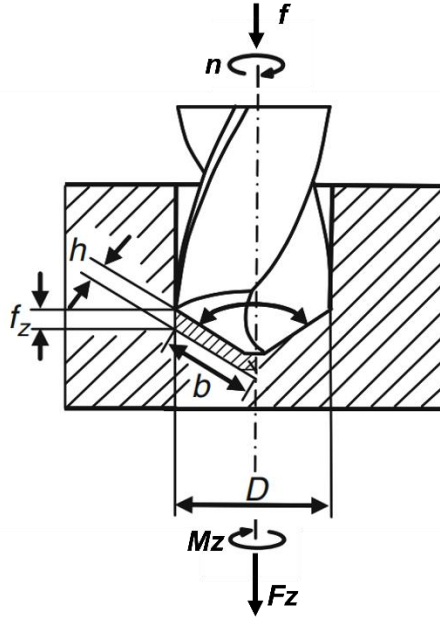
Drilling main quantities: n (rotating speed, r.p.m.); f (feed, mm/rev); f_z (feed per tooth, mm); h (chip thickness, mm); b (chip width, mm); D (diameter of the drill, mm); F_z (thrust force, N); M_z (torque, Nm) (adapted from [16]).
